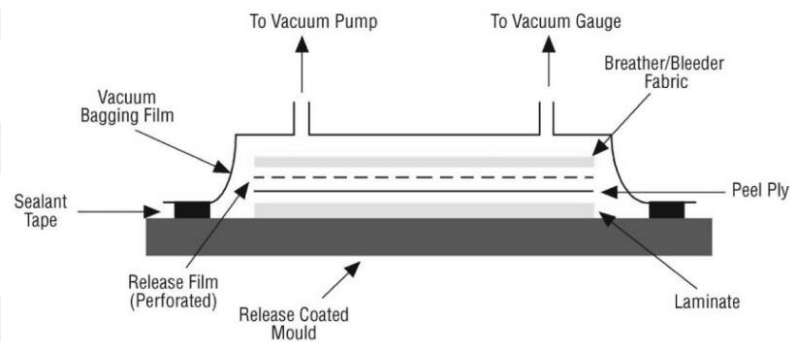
Vacuum bagging technique (Cripps, 1999)
